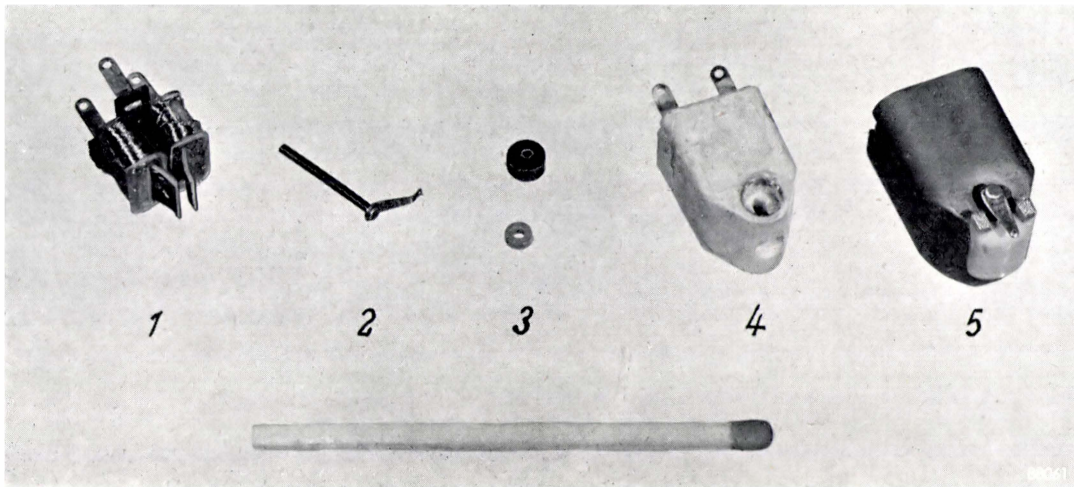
Component parts of the magnetodynamic pick-up. 1 yoke with coils; 2 magnet with needle arm and needle; 3 rubber bush and p.v.c. bearing; 4 block of polyester resin which is cast around the yoke and coils, place being left for the insertion of magnet and bearings; 5 the block 4 complete with bush, bearing and magnet and shrouded in metal housing for magnetic and electrostatic screening; on either side of the needle arm are protective shoulders.
